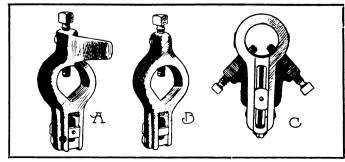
A and B, Adjustable Combination Lathe Dogs; C, Design for Heavy Work.
